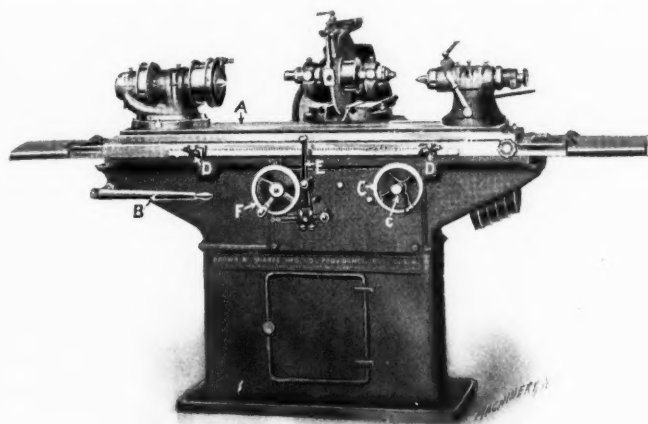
A Universal Grinder built by the Brown & Sharpe Mfg. Co.
